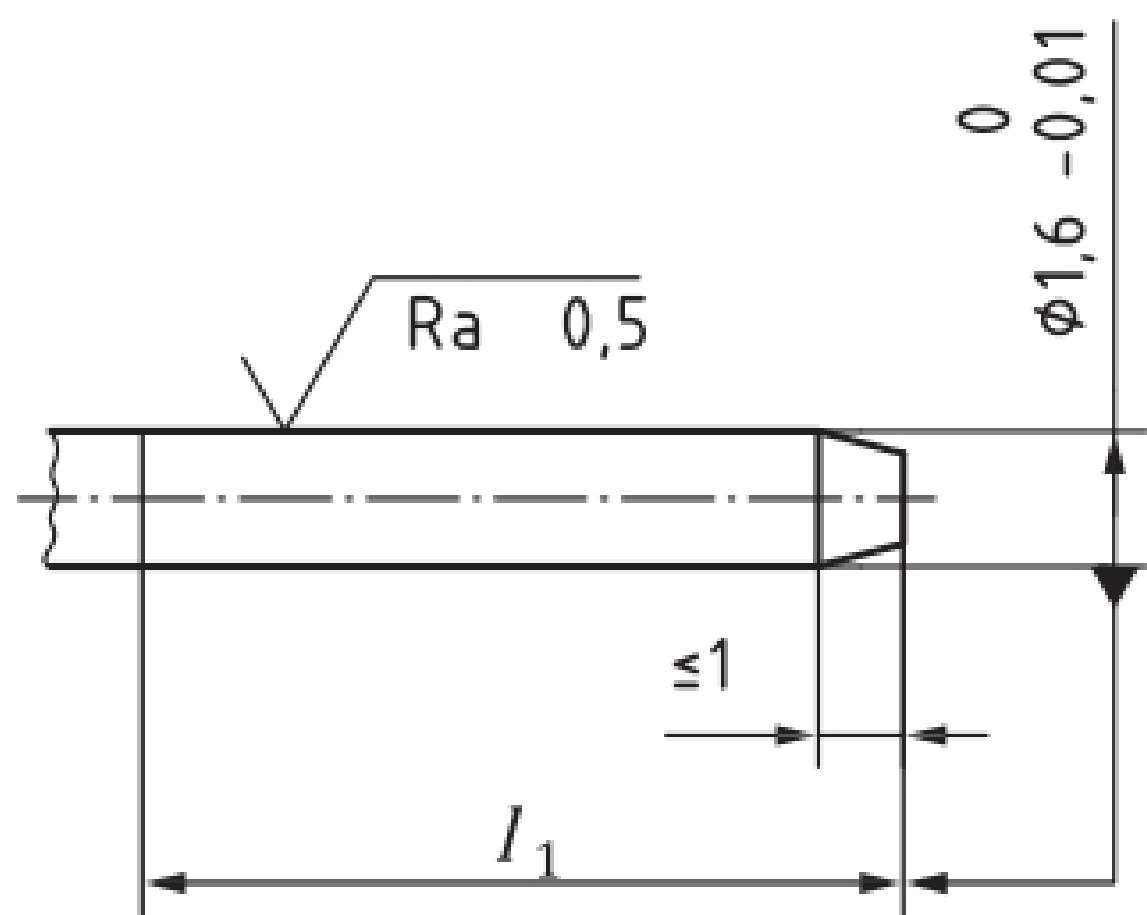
Dimensions, tolerances and surface roughness for Type 3 shank
